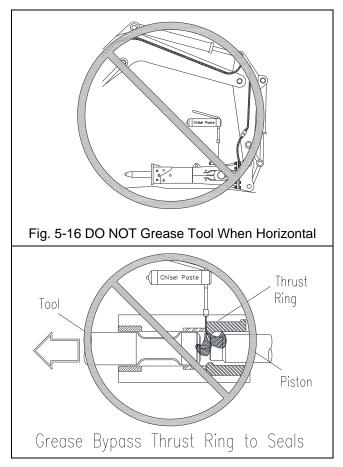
Risk of Seal Damage - Tool Unseated
